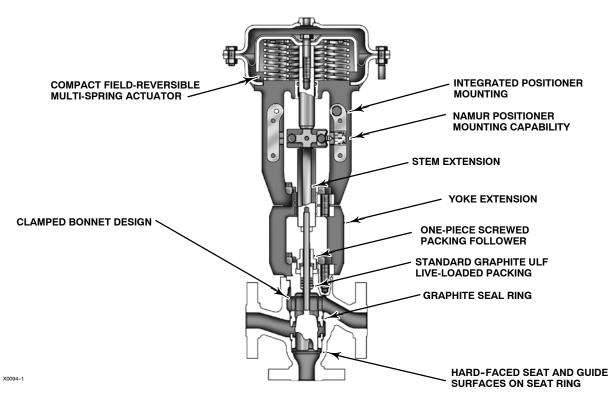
Fisher GX 3-Way High-Temperature Control Valve Assembly with Port Guided Contoured Plug (Side Port Common)
